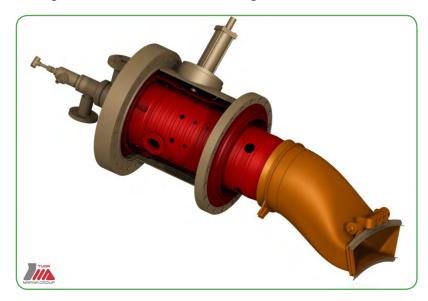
3D model of the entire combustion chamber set of the dual fuel MGT-40 gas turbine
